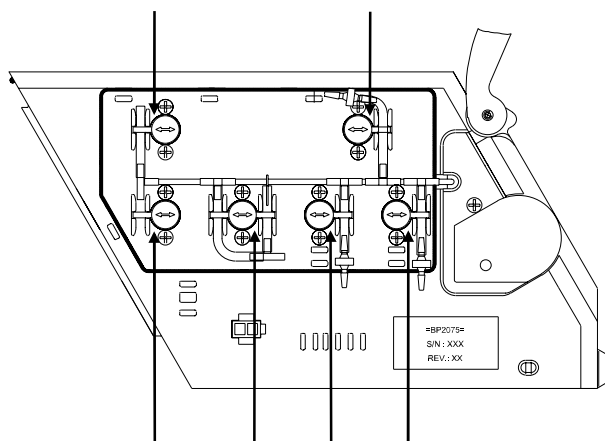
Solenoid valve relief clamps - Fill port module C2/C3
